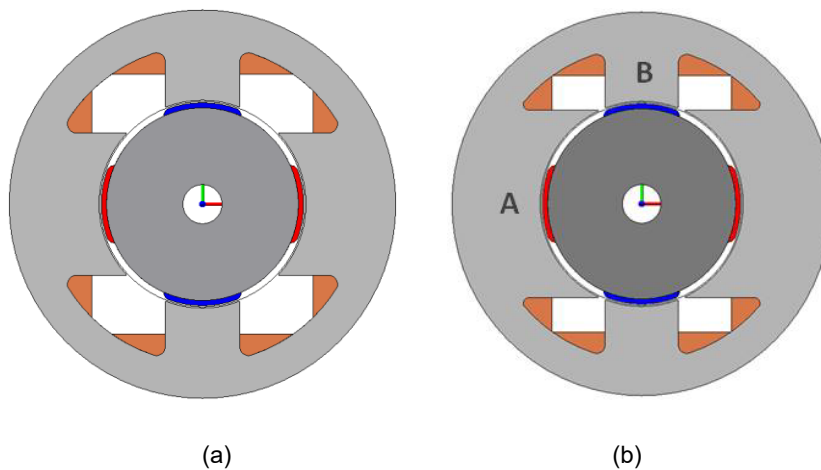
Modifying the stator design of PM BLDC prototype motor. (a) first step of stator topology designing and (b) A–B prototype motor.
